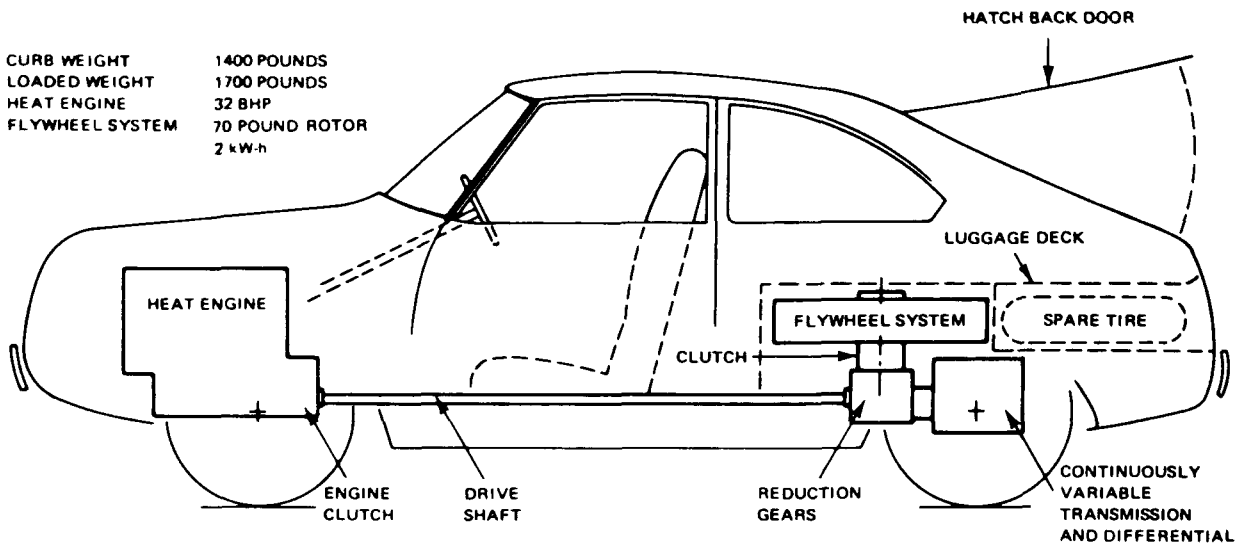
Johns Hopkins Heat Engine/Flywheel Hybrid Commuter Car
